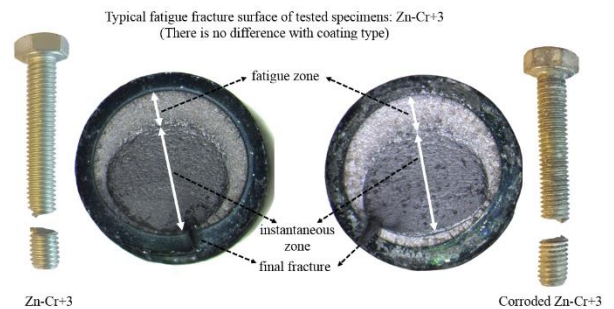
Fatigue fracture surface of the tested specimen; Zn-Cr+3 vs corroded Zn-Cr+3.
